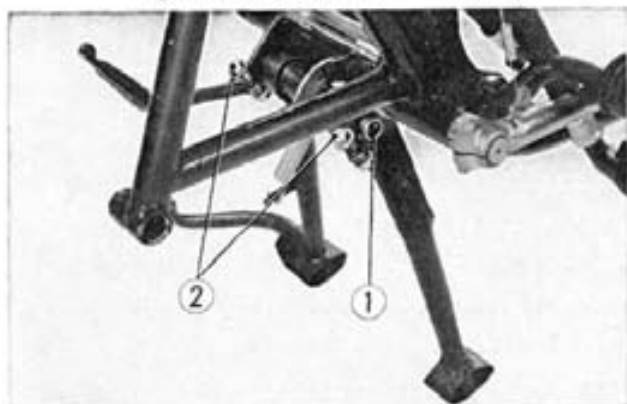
① Cotter pin ② Main stand mounting bolts
